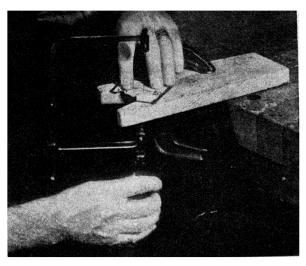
Using a jewelers' saw to cut ornament from sheet metal.
